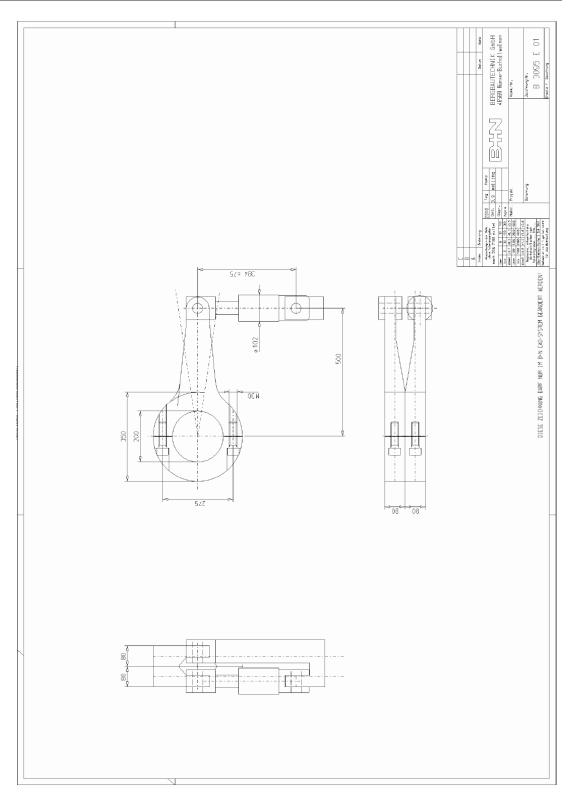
Technical drawing of the making/breaking wrench for the main screw thread on the CDS
